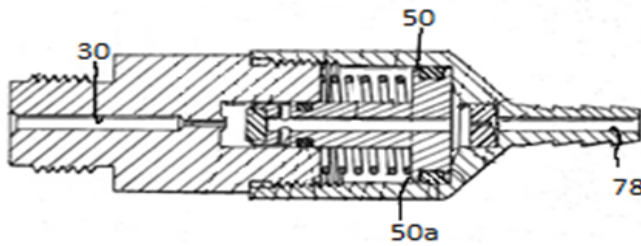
A piston 50 having one extreme 50a facing the inlet 30 and an opposite extreme facing the outlet chamber 78.
